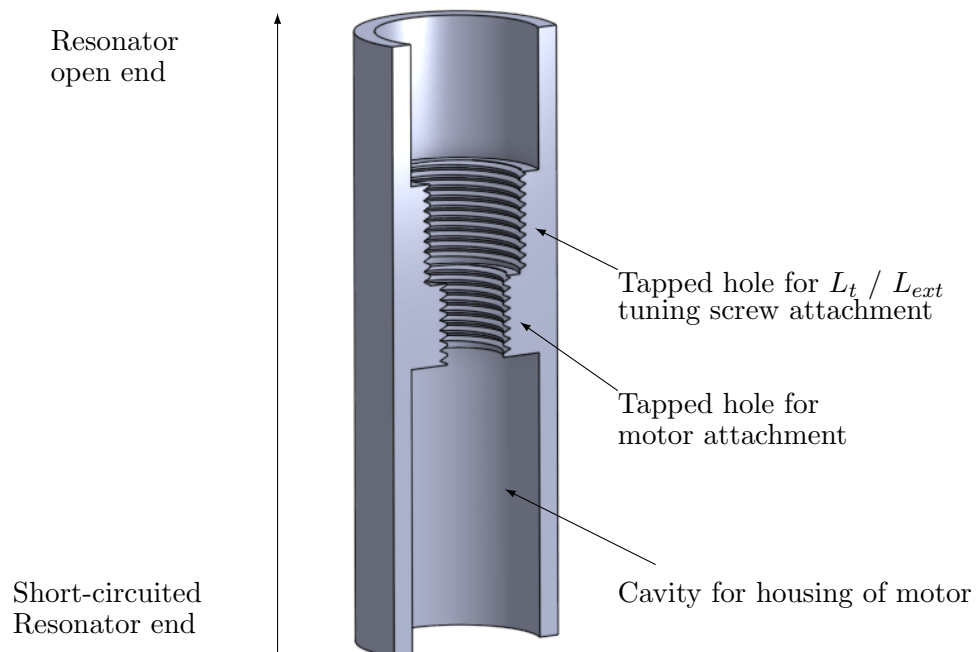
Physical design shape of resonators (and transformers) with the front section removed
